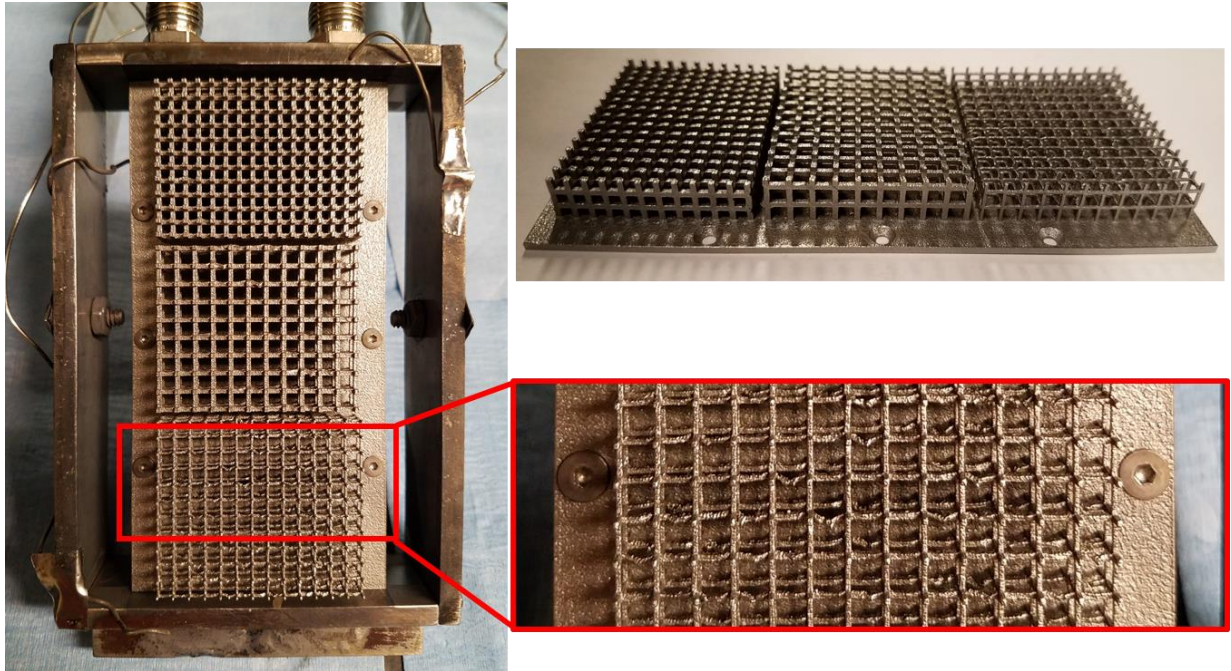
Left: Tri-fold foam plate installed in the base module. Top Right: Side view of the tri-fold foam plate. Bottom Right: Close-up view of the case  $C_I$  foam displaying machining defects.
